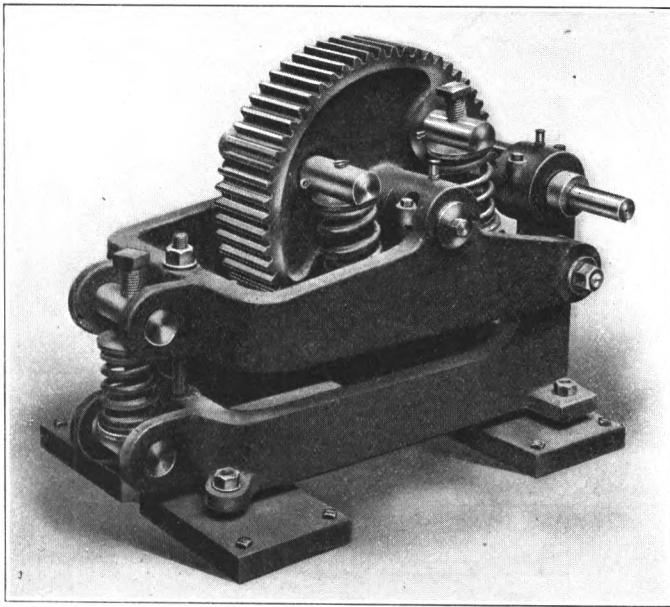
VIEW SHOWING ARRANGEMENT OF PIVOTED FRAME AND SPRING FOR MEASURING THRUST
